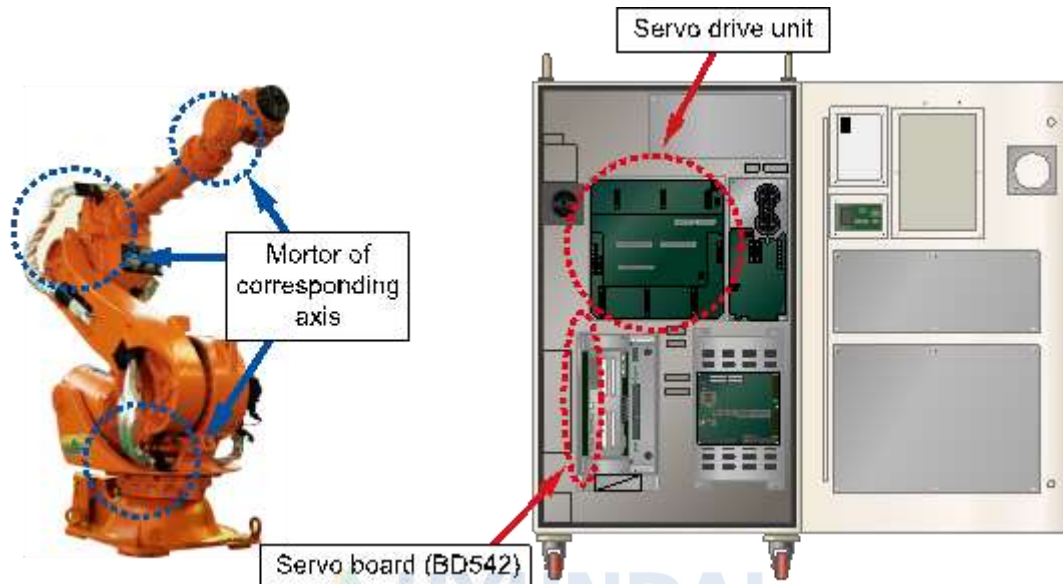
Replacing other parts (such as servo boards, servo drive units, and motors)
